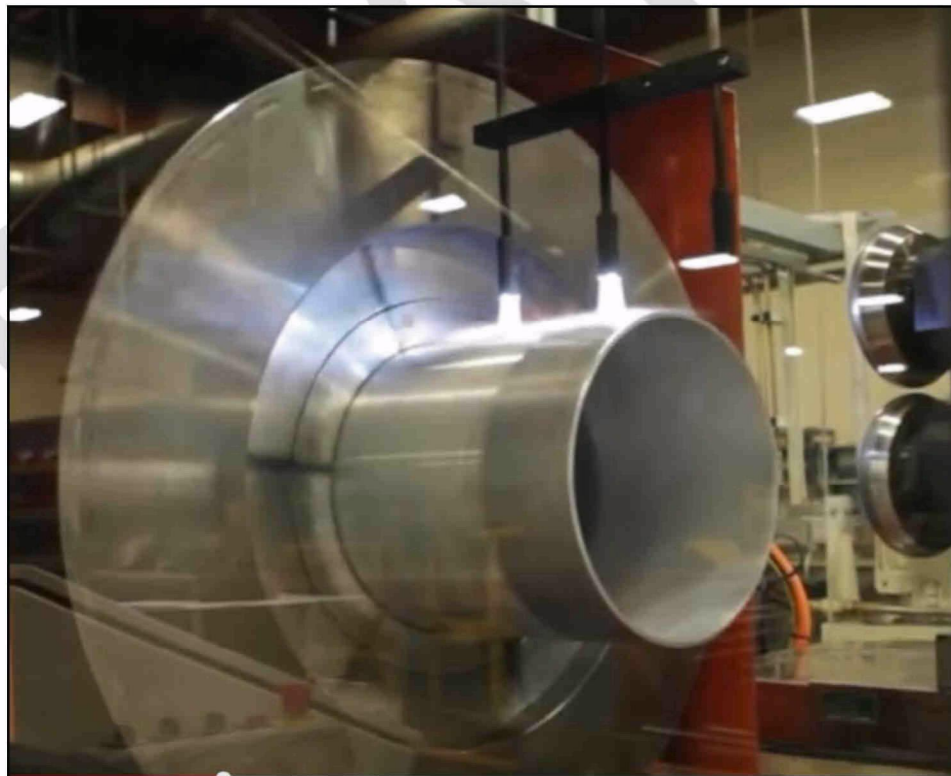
Step 3: Preheating of Blank Prior to Spin Form
